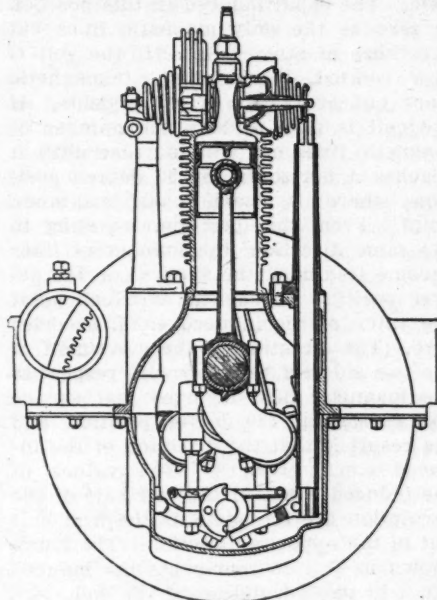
Cross-sectional view of the Cameron air-cooled engine showing the surface cams which impart an oscillating motion to the valve rods
